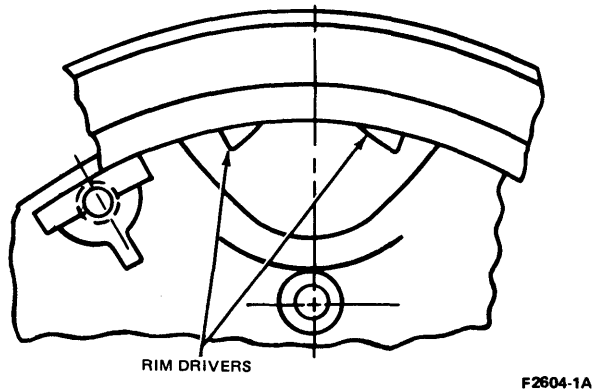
Cast Spoke Wheel Rim Driver Arrangement
